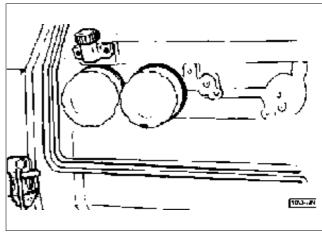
Fit the oil filler and engine oil filters; then fit the fuel filters and the fuel prefilter. Connect the fuel lines;
